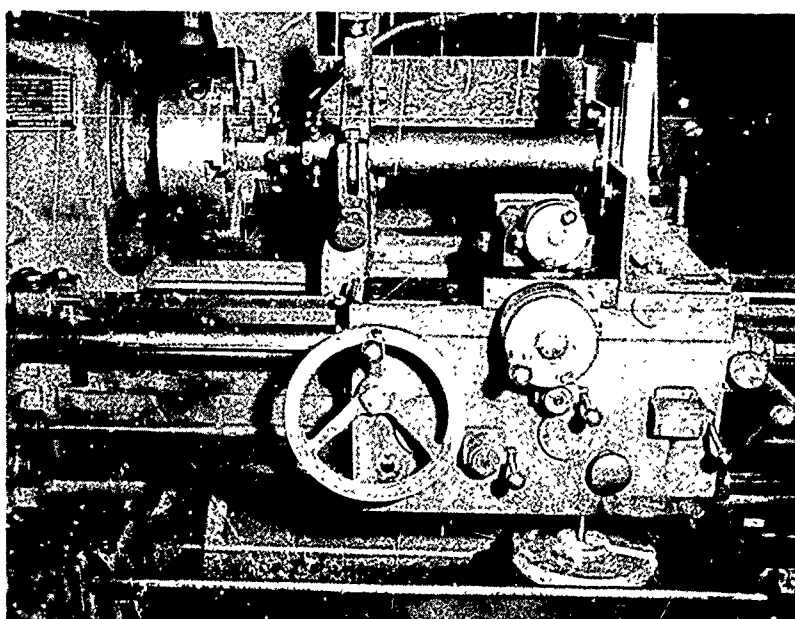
EXPERIMENTAL SET UP FOR FATIGUE CRACKING OF THE 4330V MODIFIED STEEL ROUND CENTER NOTCHED FRACTURE TOUGHNESS SPECIMENS
